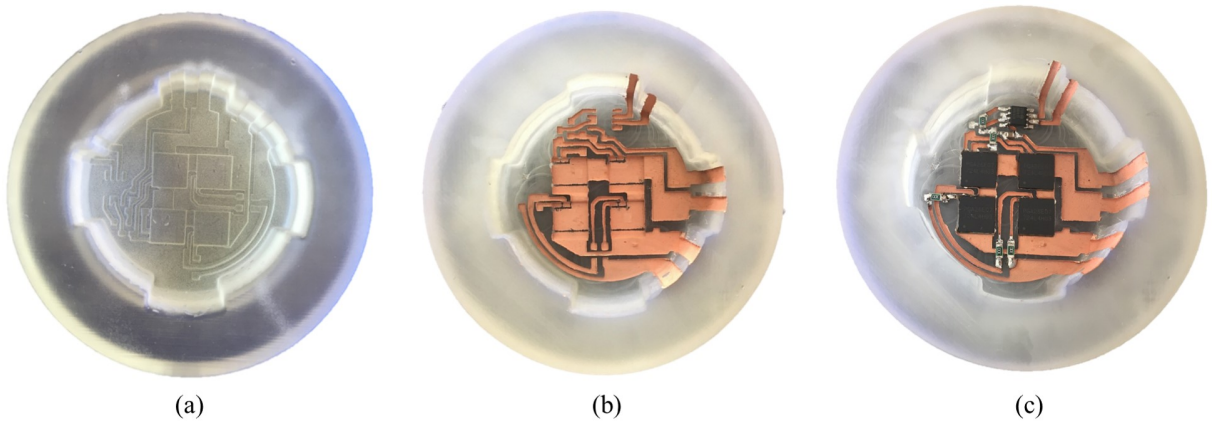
Images of the evaporator fabrication steps: (a) 3D printed evaporator, (b) Electroless copper plating of electronic circuit, (c) Soldering of the components.
